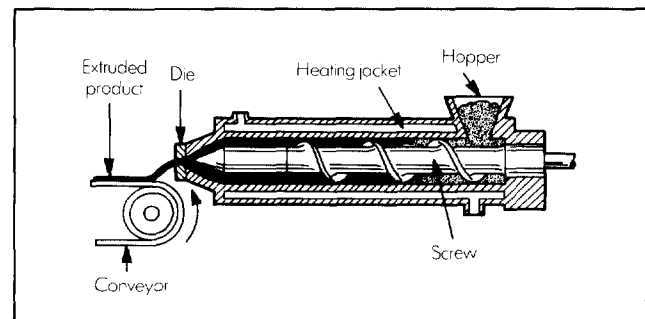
Schematic arrangement of a plastic extrusion machine.
